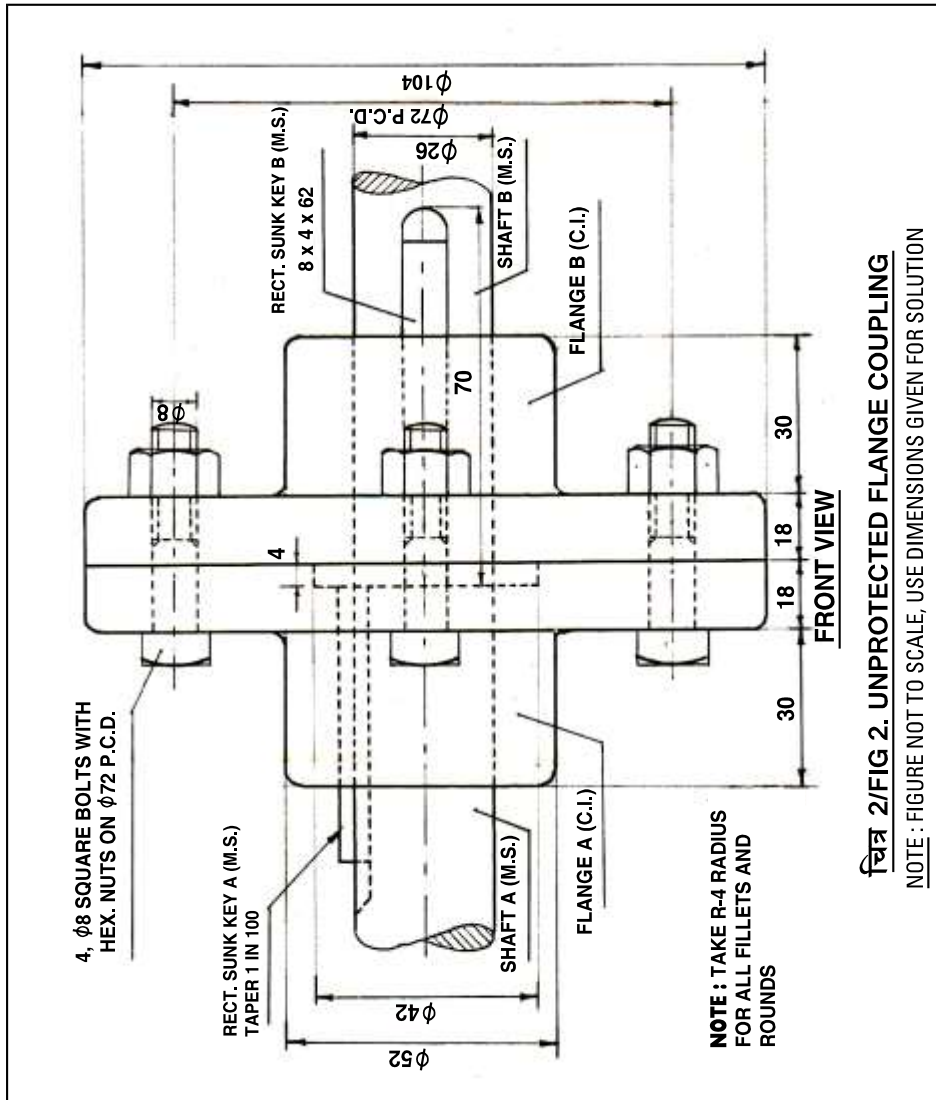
shows the assembly of an Unprotected Flange Coupling. Disassemble the parts correctly and then draw to scale 1 : 1 its following views of the following components. Keep the same position of both flange and shaft with respect to H.P. and V.P.
